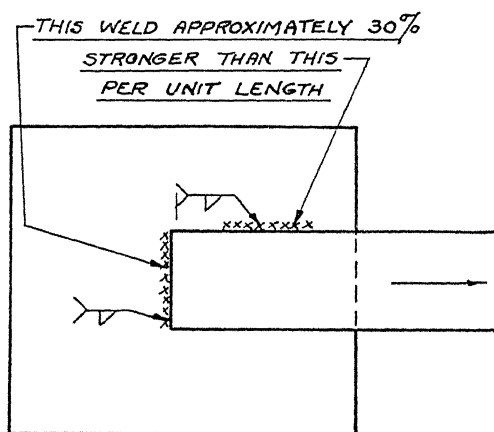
Transverse welds are stronger than welds parallel to lines of stress.
